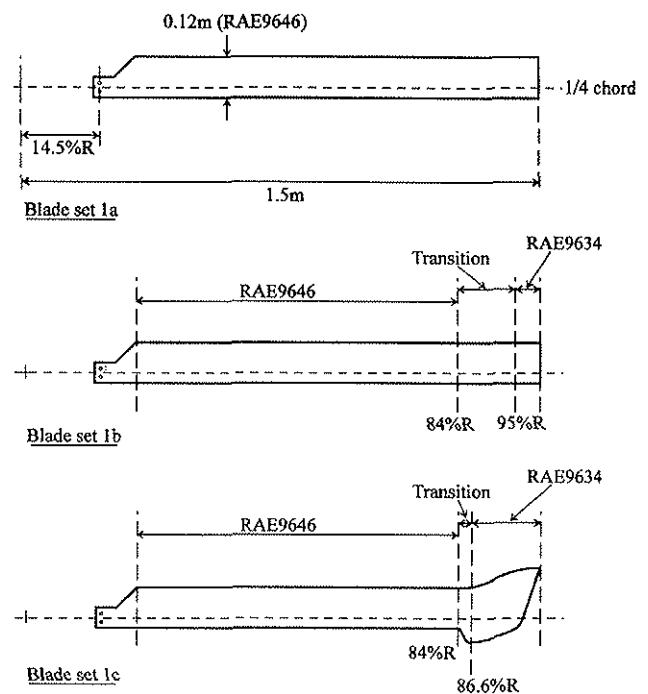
Geometries of the 1a, 1b and 1c rotor blades
